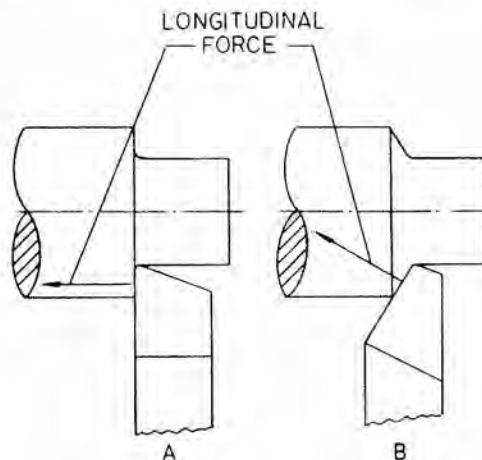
The direction of the reaction of the longitudinal cutting force is perpendicular to the side-cutting edge. An equal and opposite force that is not shown reacts against the cutting edge.
